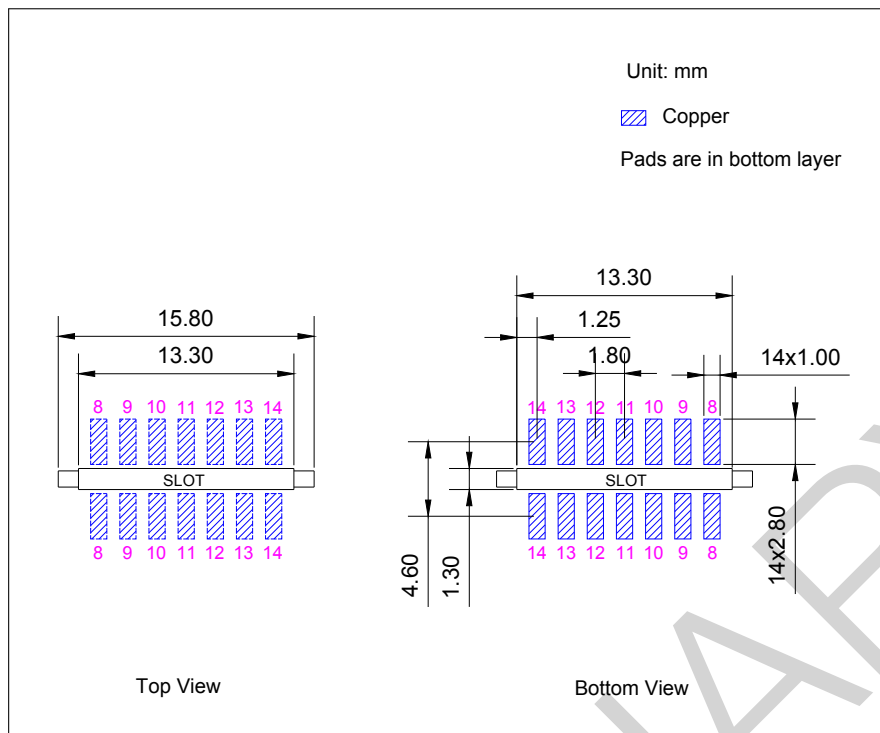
Recommended PCB Land Pattern for Vertical Module Soldering
